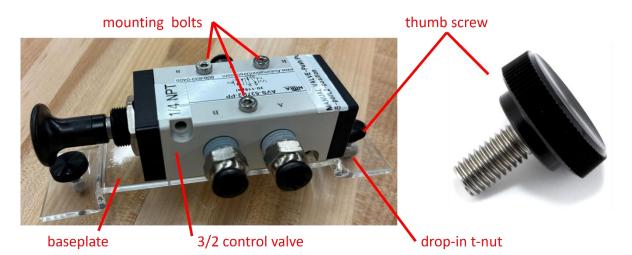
Directional control valve mounted to an acrylic baseplate with mounting bolts. Thumbscrews, and drop-in t-nuts are used to secure the baseplate to the 80/20 rail (not shown).
